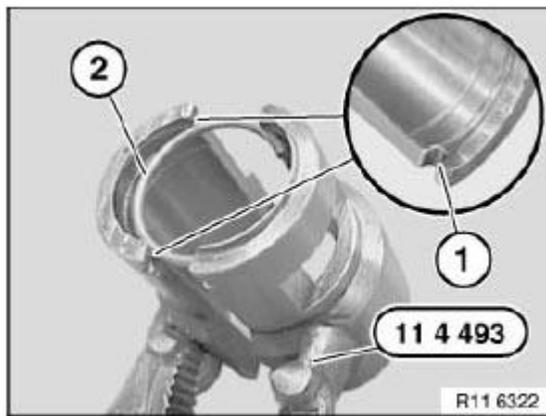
Inserting Gudgeon Pin Circlip Into Special Tool Groove
